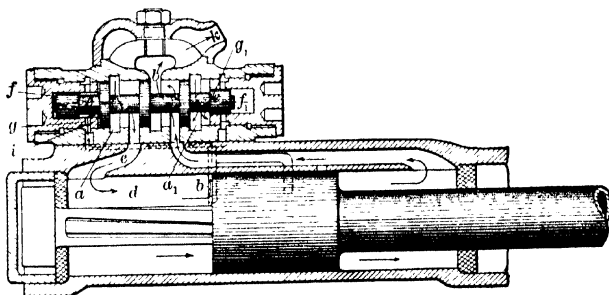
Siskol Drill ( $2\frac{9}{16}$ -in. diam. of cylinder).
